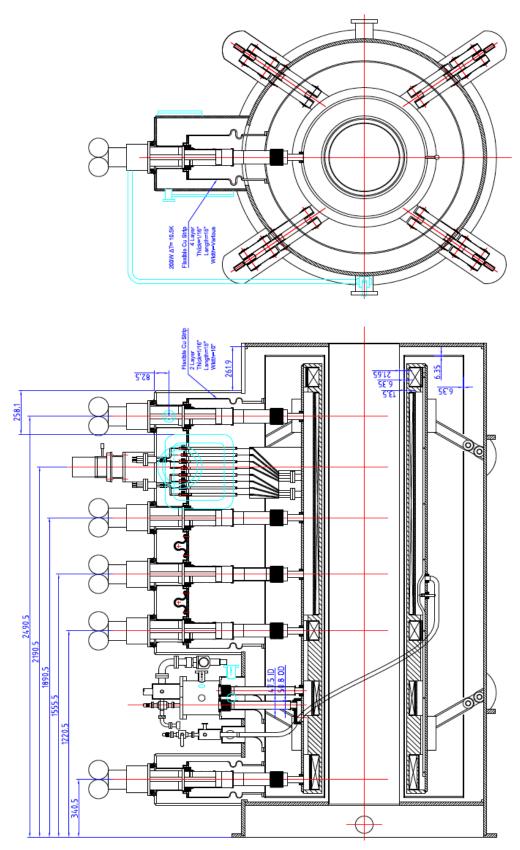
Layout of the modified cooler arrangement (5 ea 2-stage, 1 ea 1-stage)
